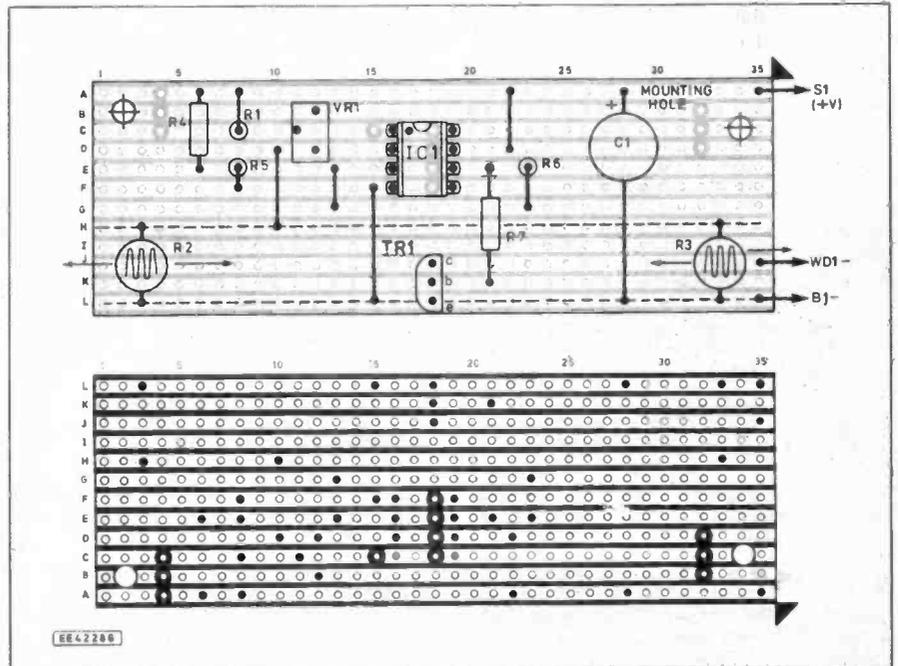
Stripboard component layout and details of breaks required in the underside copper tracks. Layout of components inside the box is shown below.
